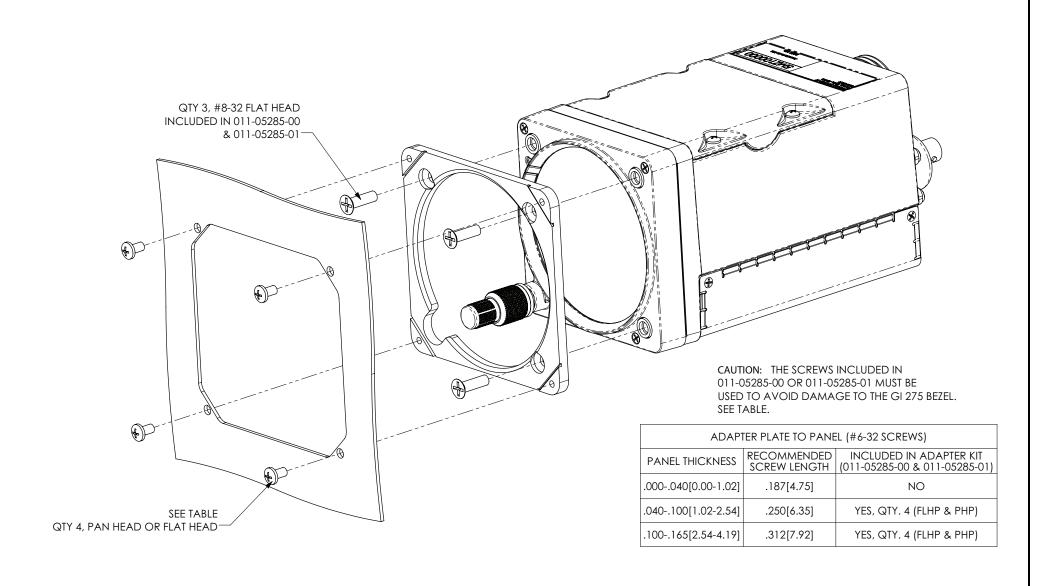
GI 275 Installation Drawing with Optional Adapter Plate
